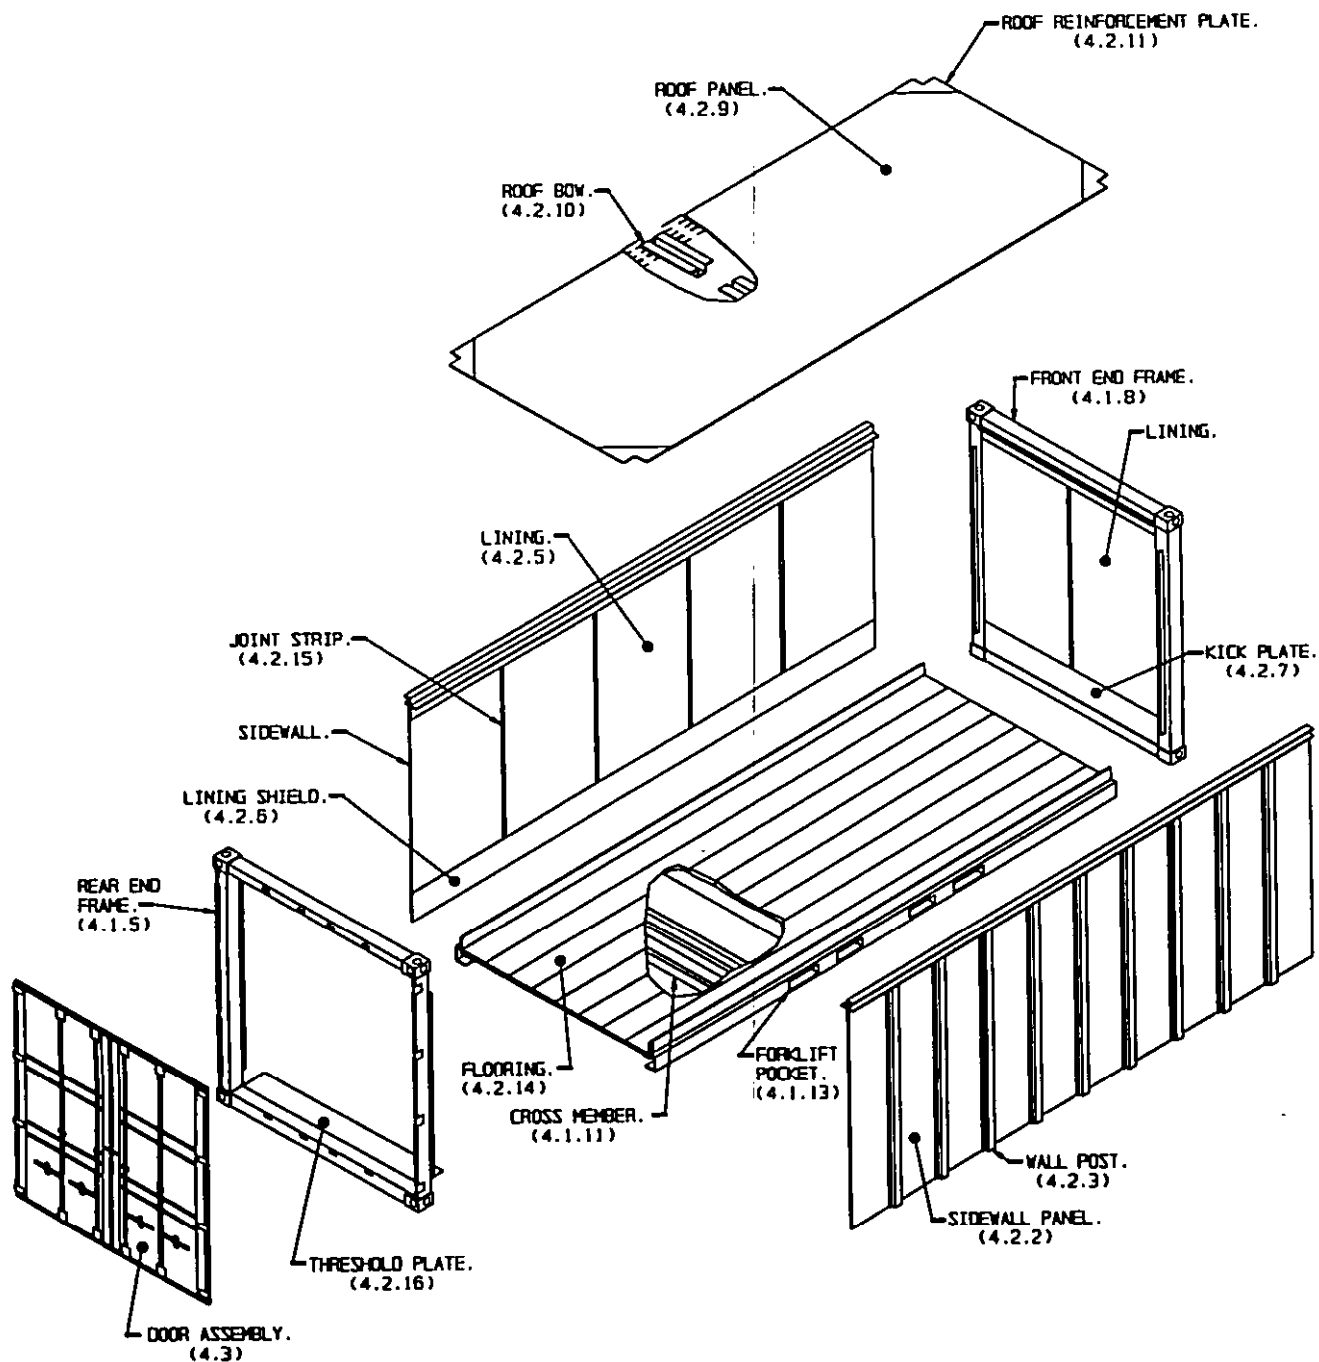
B - TYPICAL ALUMINUM CONTAINER (EXPLODED VIEW)
